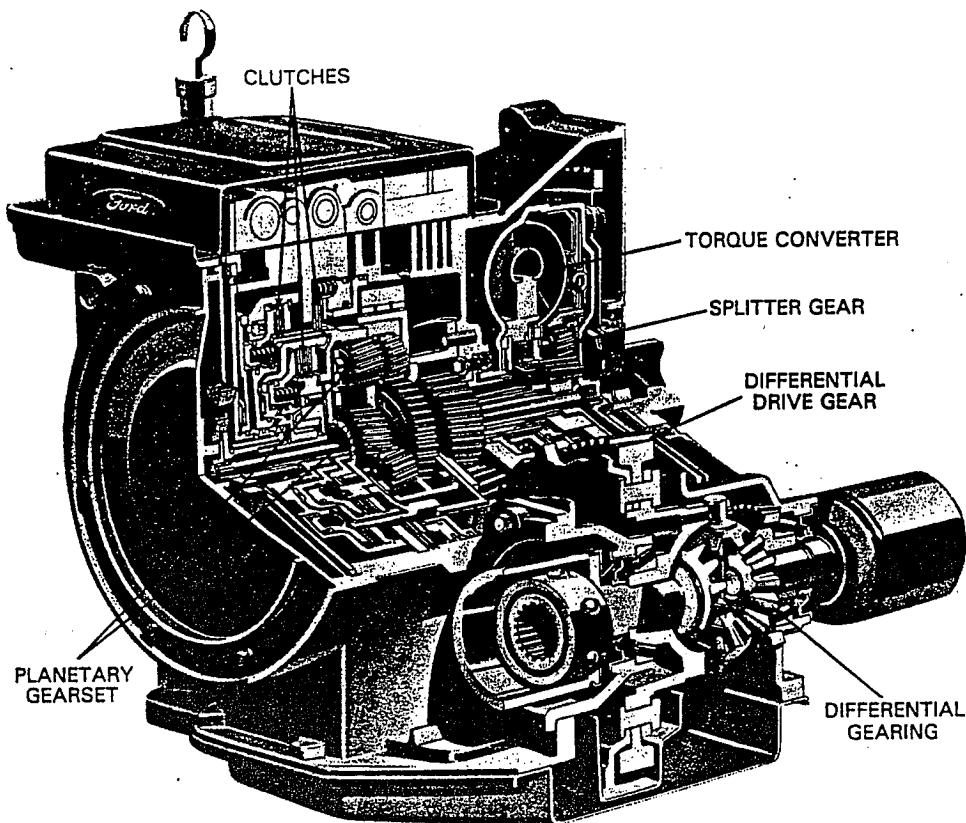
Ford split-torque, three-speed automatic transaxle. Note "splitter gear." This arrangement divides engine torque in second and drive gears. In second gear, 38 percent of the torque transmission (output) is through the converter and 65 percent mechanically. In drive, 93 percent of torque is transmitted mechanically with only 7 percent through the converter. This prevents most converter slippage. (Ford)
